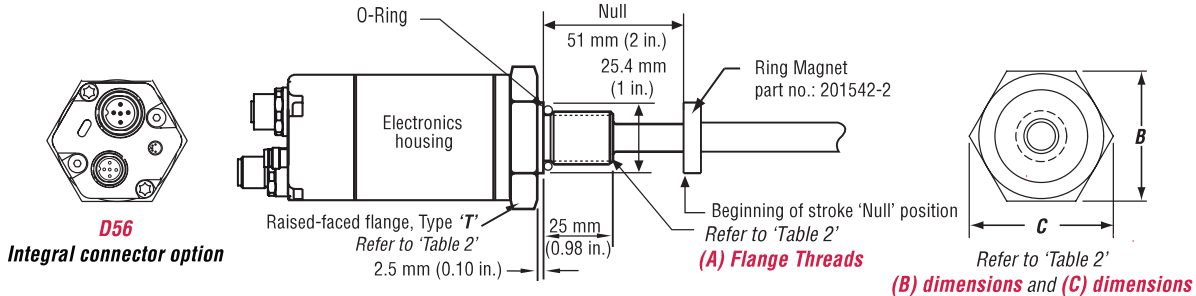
Model RH Rod-style sensor dimension reference (Shown with the D56 Integral cable connection type option)
